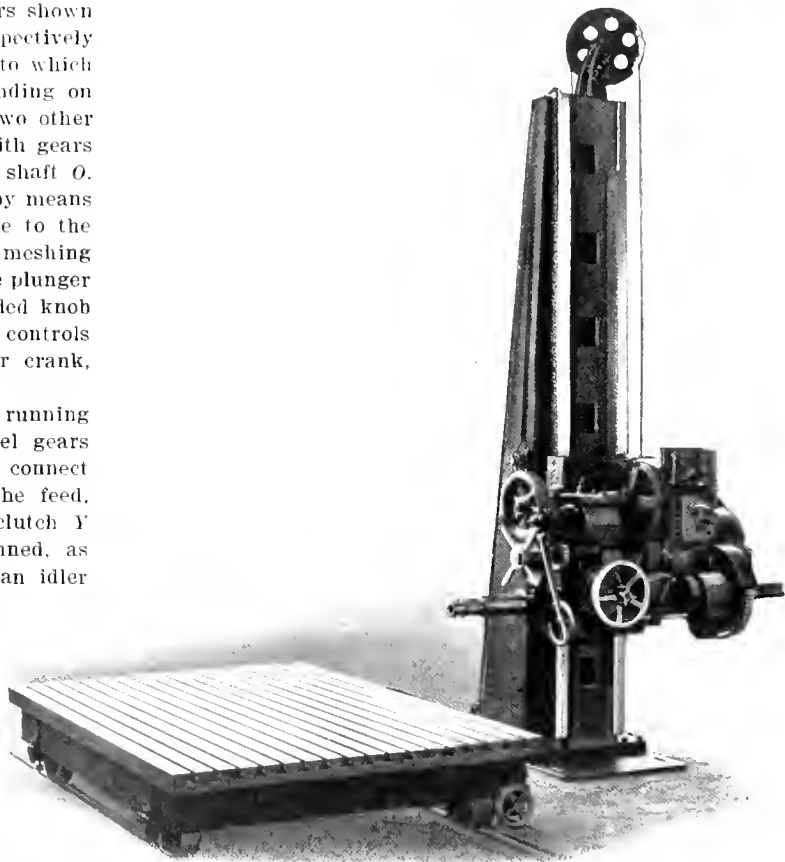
No. 7 Horizontal Drilling and Milling Machine, with Box Type of Column
